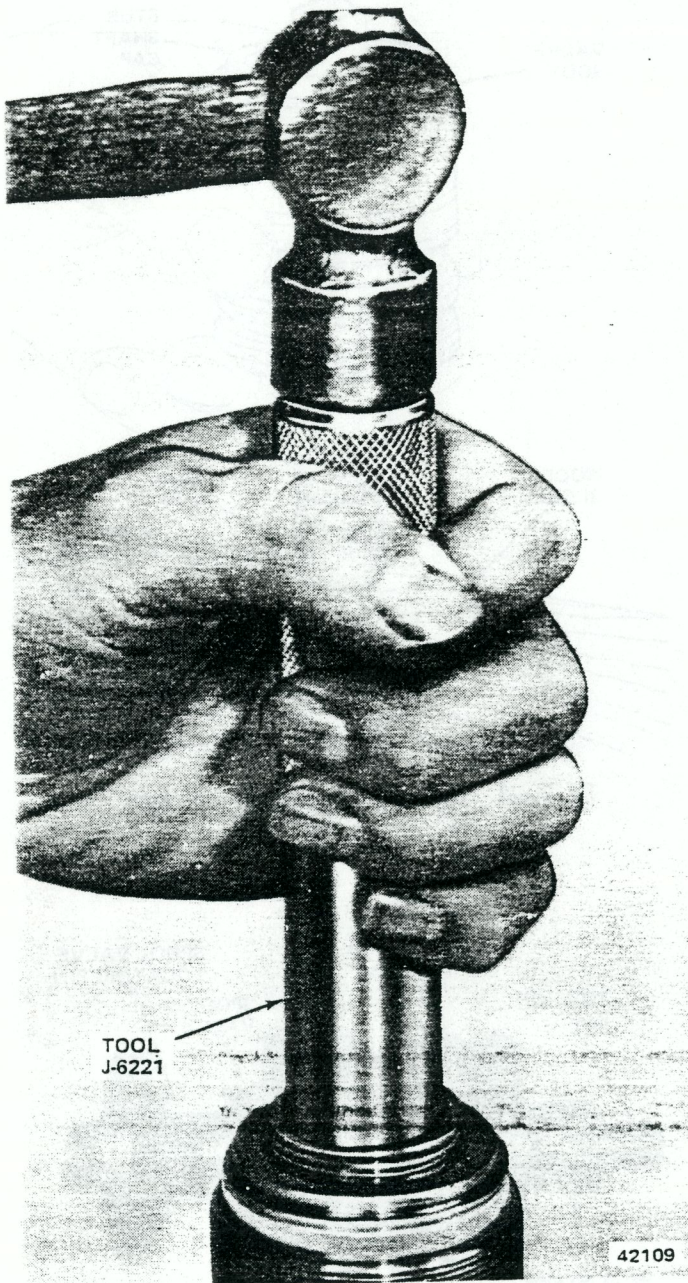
L-25 Adjuster Plug Needle Bearing Removal/Installation
